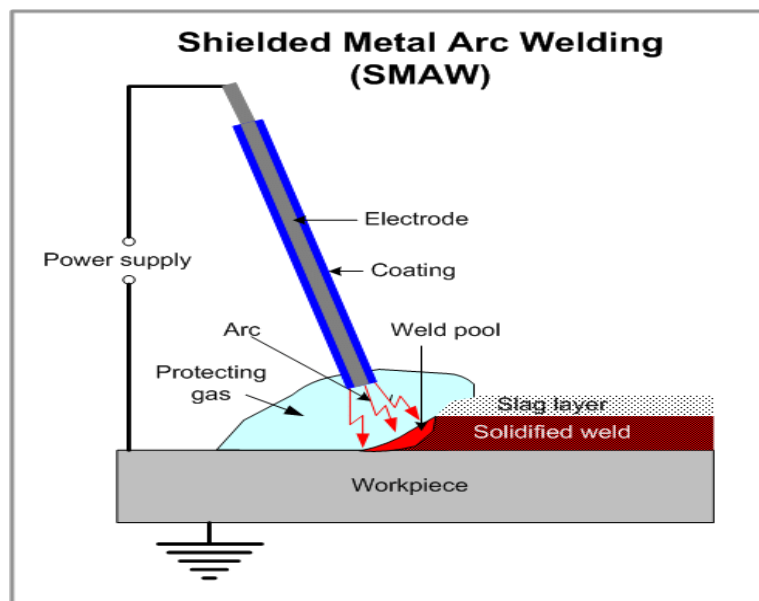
Arc welding with SMAW Coated Electrodes: Principle diagram (Yusof et al., 2020).
